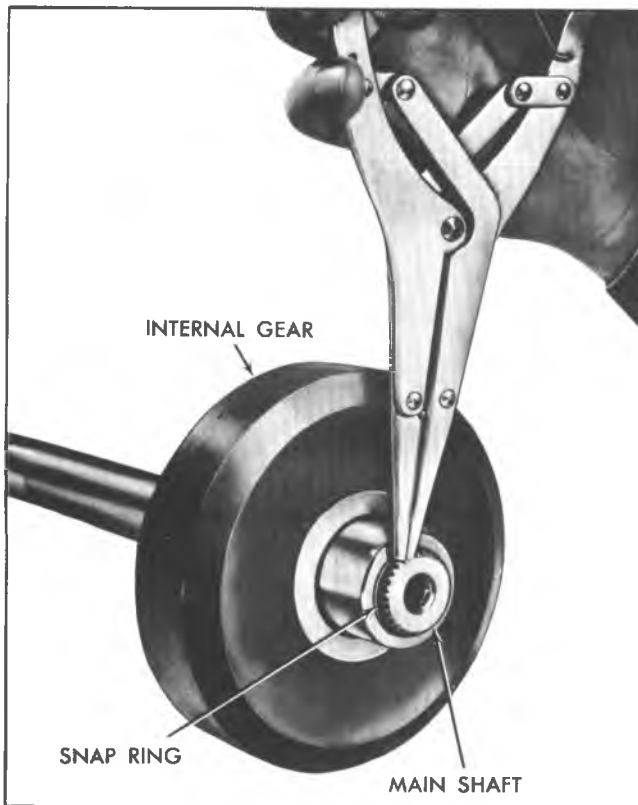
A-52C--Removing Rear Internal Gear to Main Shaft Snap Ring
